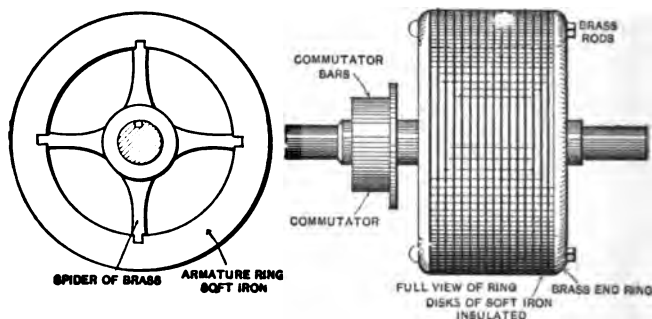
ARMATURE-CORE, RING TYPE.— FIG. 322.
